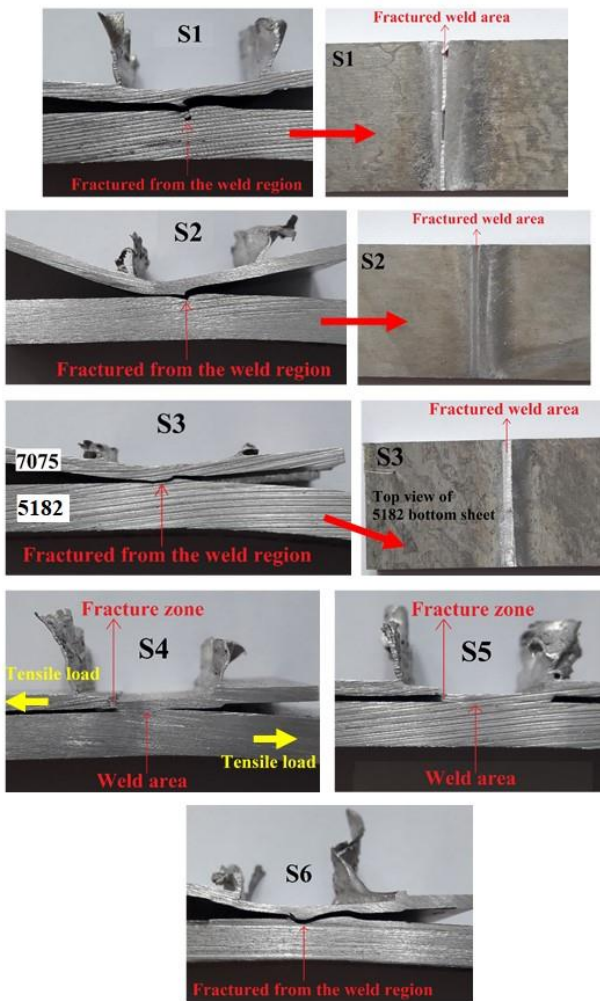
Photographs of the fractured welds during tensile testing
